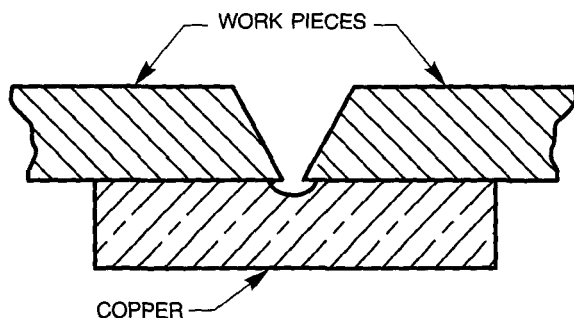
Positioning of Copper Backup Bar Used to Obtain Full Penetration Weld
